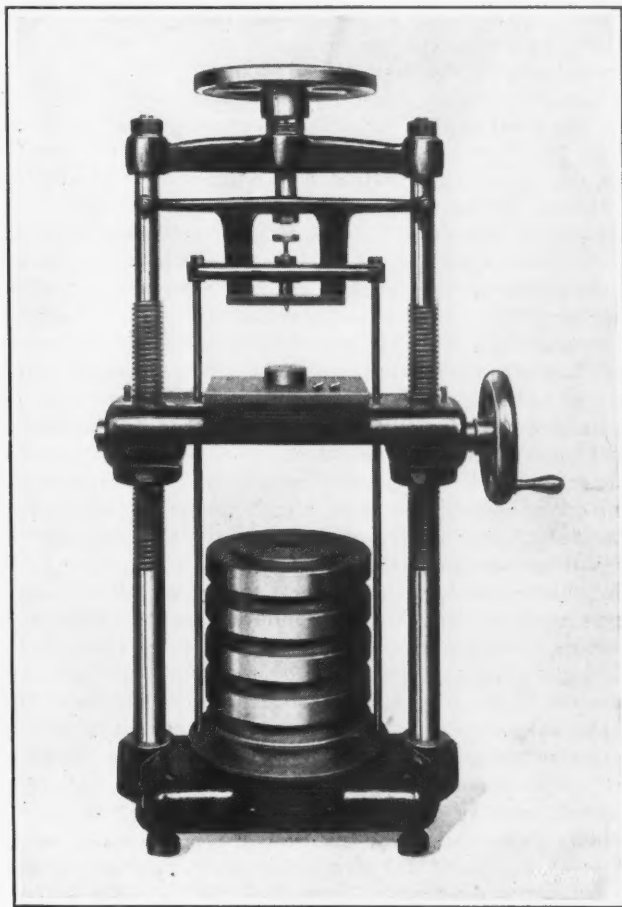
Machine developed by Alfred Herbert, Ltd., for testing the Hardness of Thin Specimens
